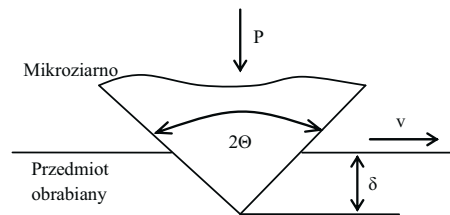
Mechanical model of the contact between an abrasive particle and the workpiece
